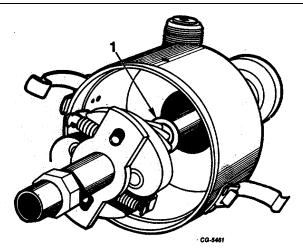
Upper Thrust Washer (Distributors With Tachometer Drive)
